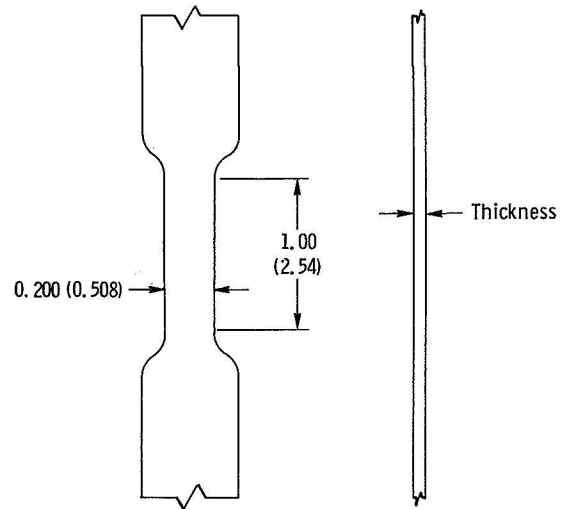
Tensile strength test specimen dimensions. Thickness varies from 0.004 to 0.006 inch (0.010 to 0.015 cm) for different materials. All dimensions are in inches (cm).
